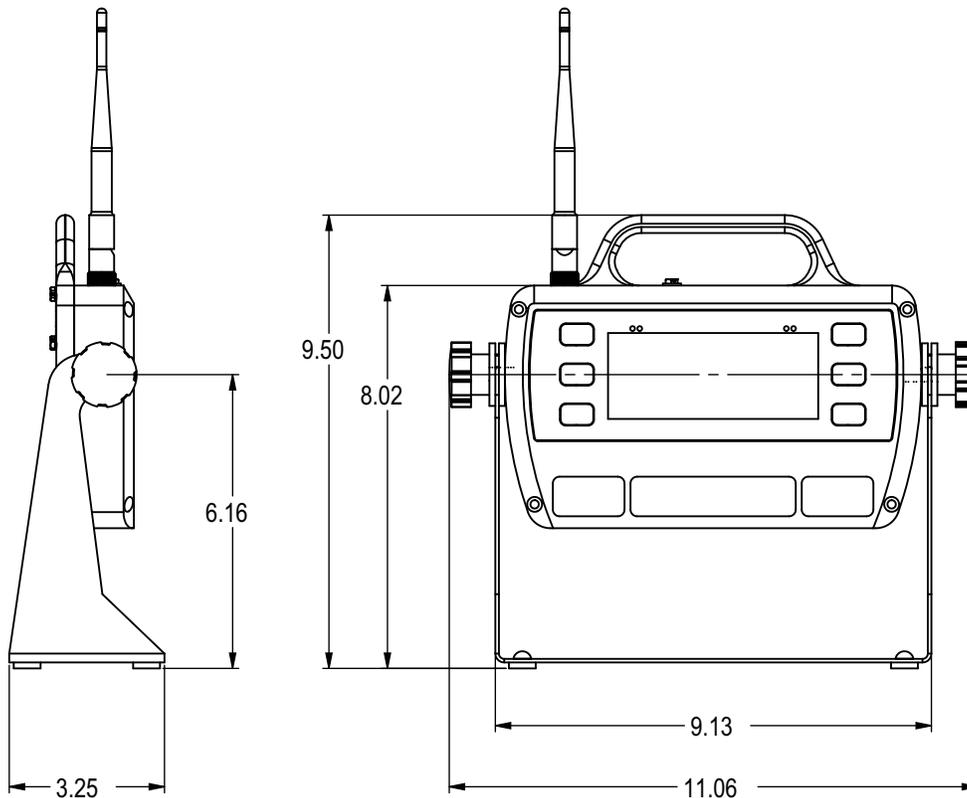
MSI-8000HD Dimensions with Tilt Stand
